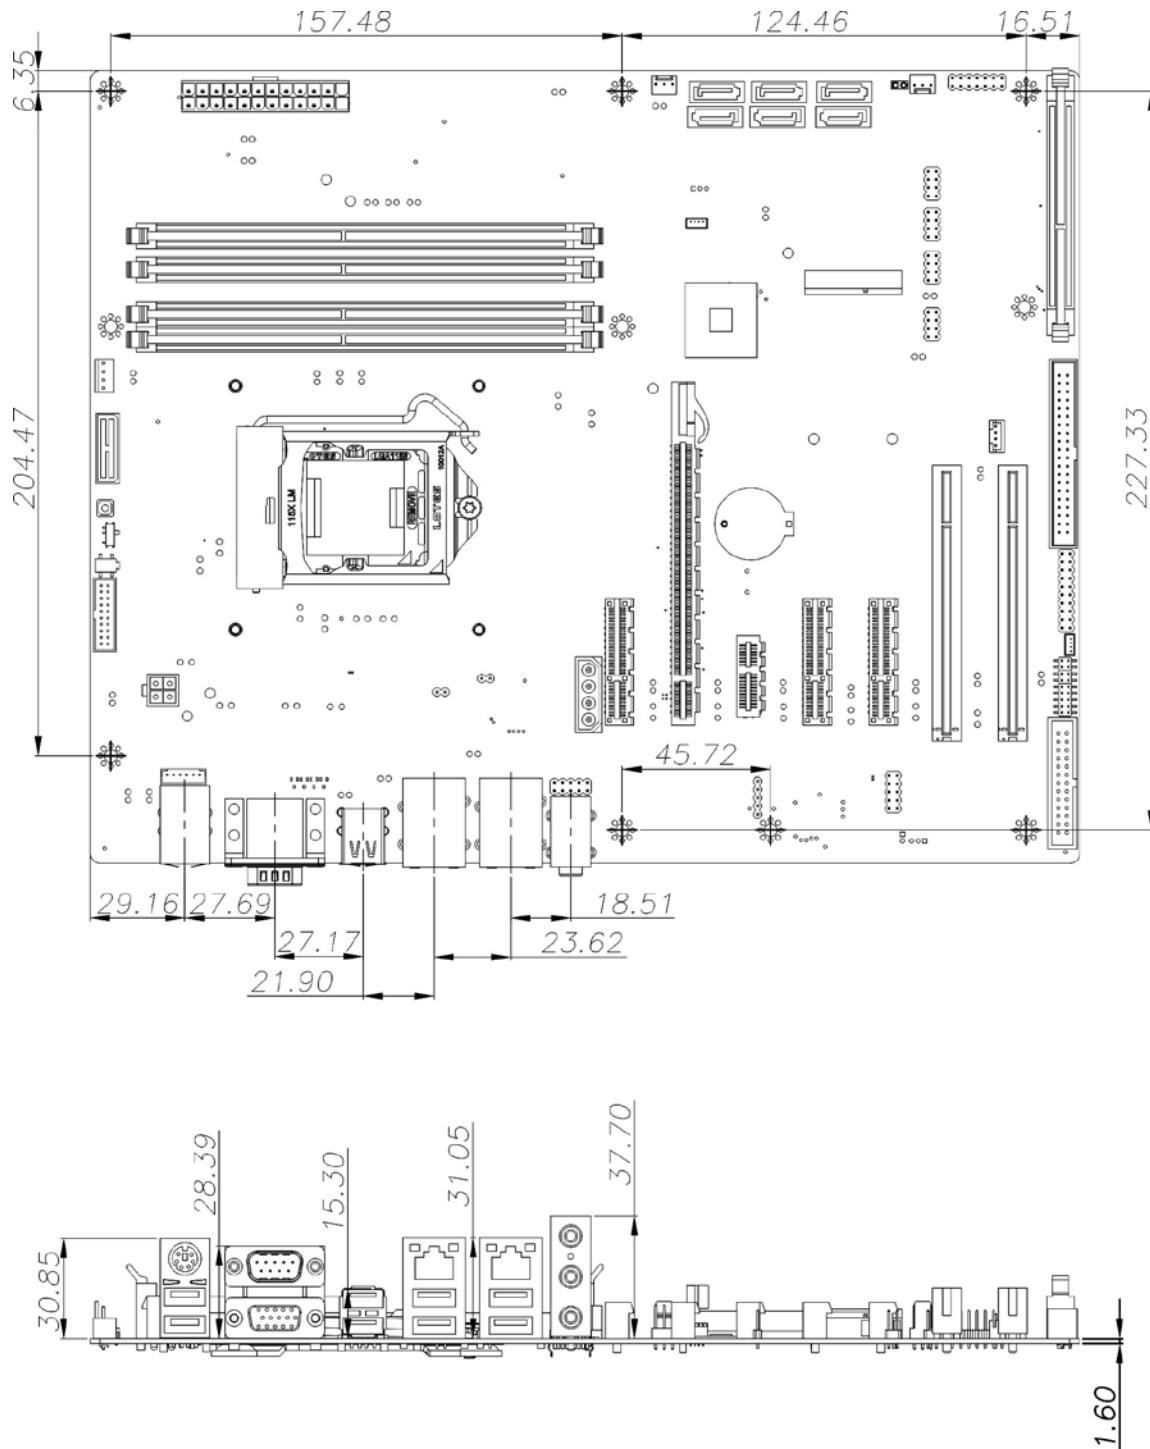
IMBA-C2260-i2 Dimensions (mm)
